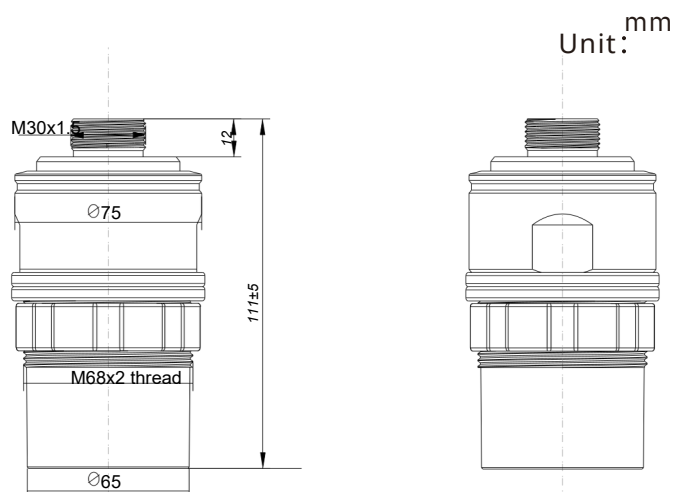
15m ultrasonic sensor dimensions (unit: mm)
